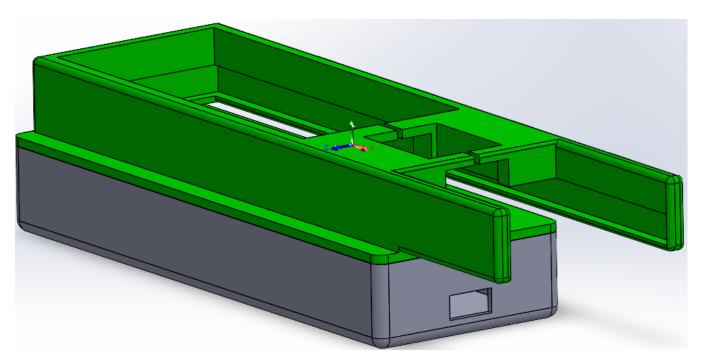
Possible Improved Design with the Battery Housing and the Circuit Board Housing Lid Combined
